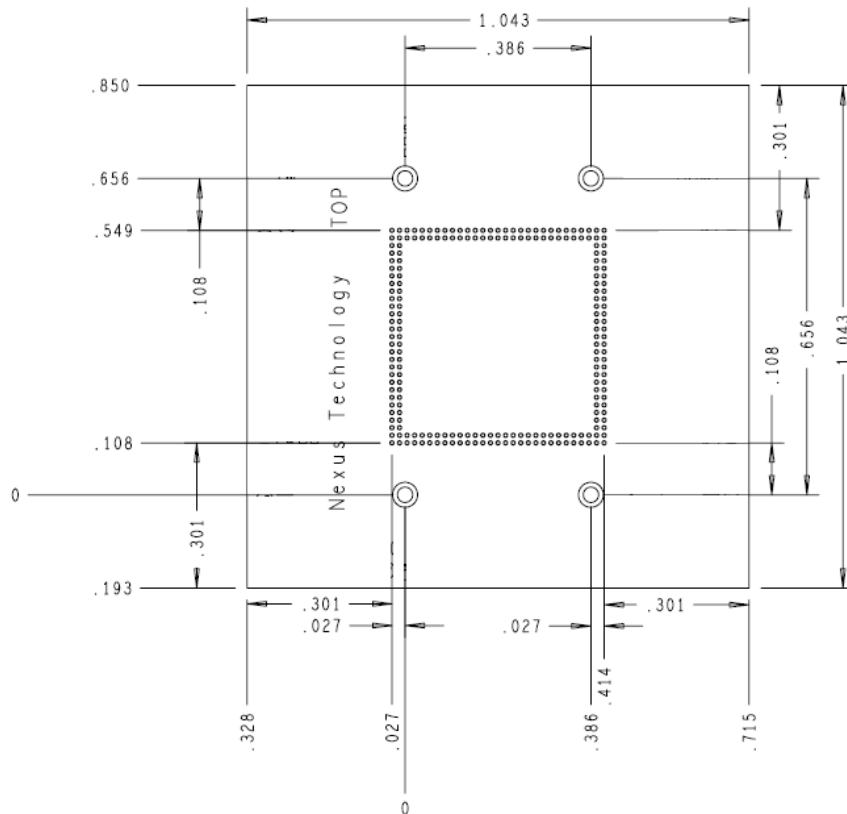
LPDDR3 216-Ball PoP Oscilloscope Component Interposer Dimensions
